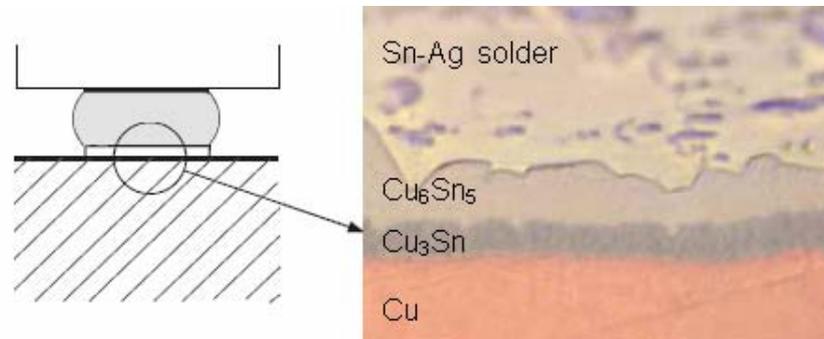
Structure of BGA soldered joint with intermetallic compounds and its details for SnAg solder[5]
